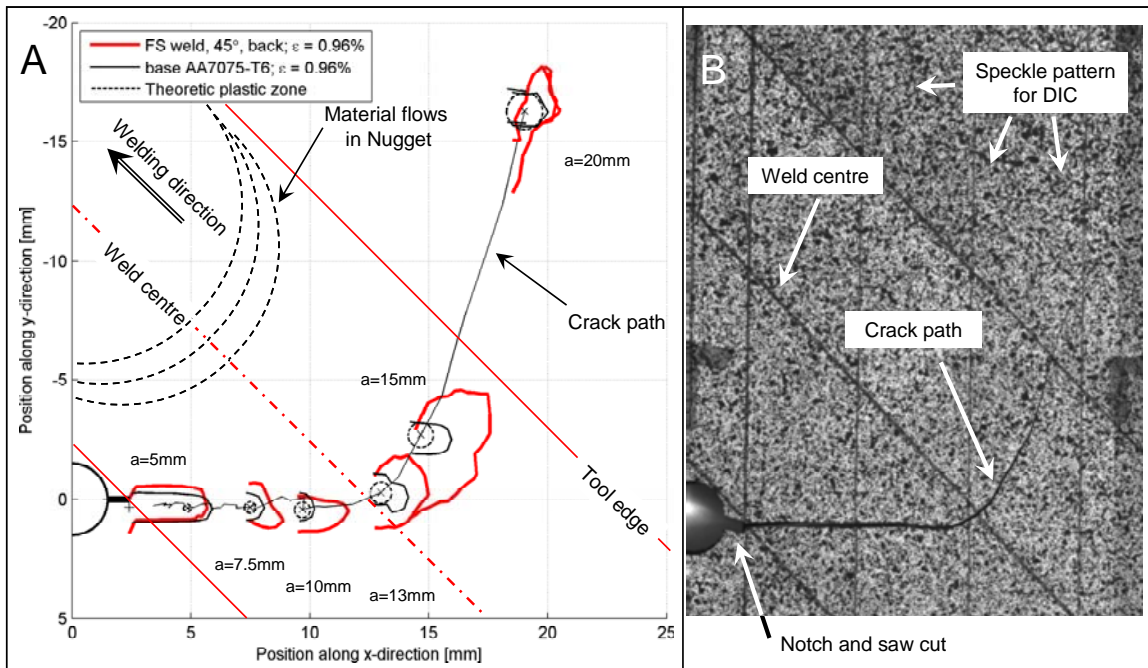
, A: Contour plots FS welded AA7075-T6; 45° configuration; back side FS weld, B: image of specimen with crack path
